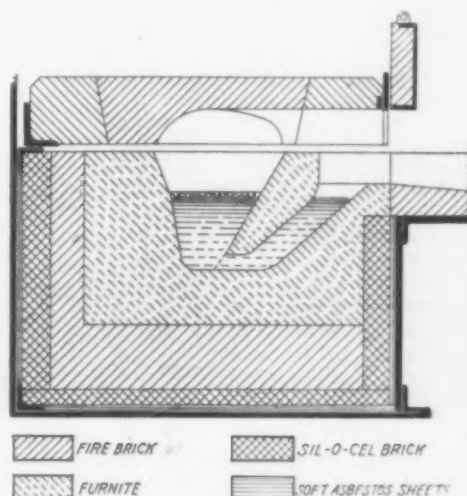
The Pouring Spout Connects as Indicated with the Lower Part of the Bath and the Section Drawing Shows How the Refractory Material is Built Up
